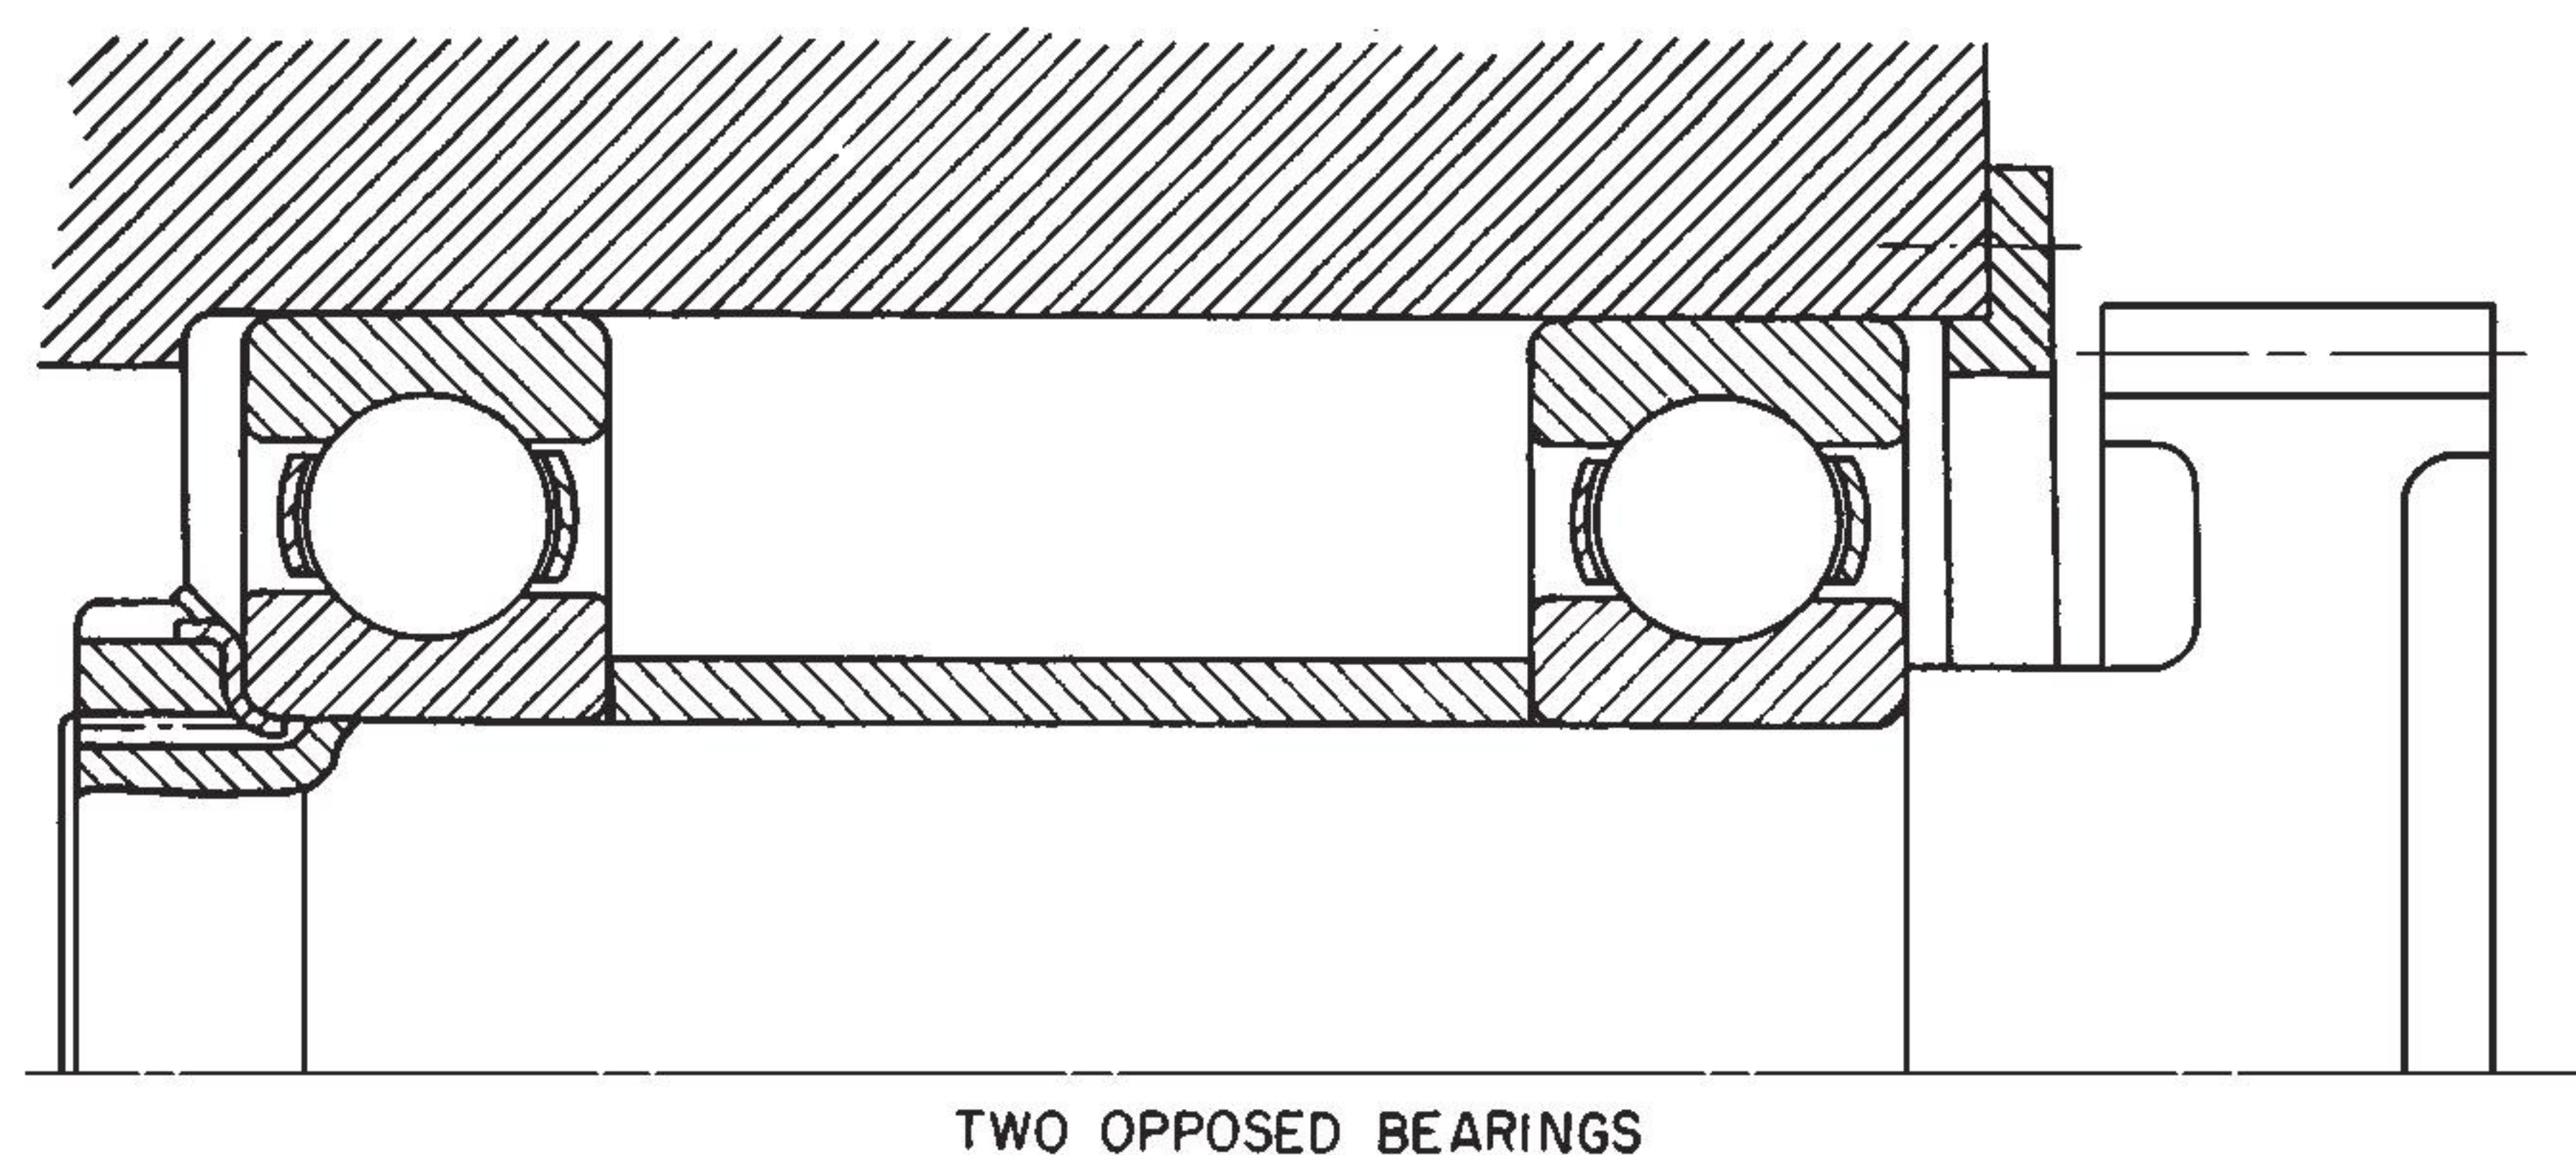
Example of assembly with opposed mounting of ball bearings.
